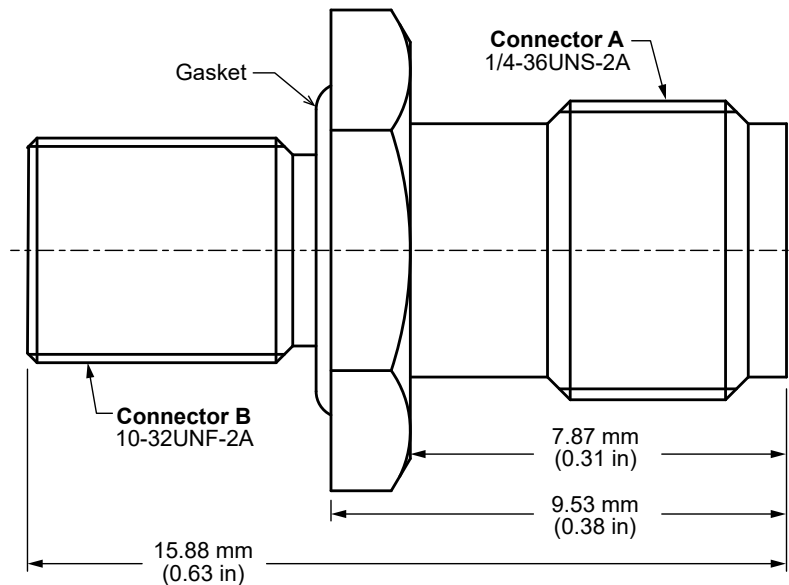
Product Dimensions for the ADP-SMAF-SMPM-SSB Adapter
